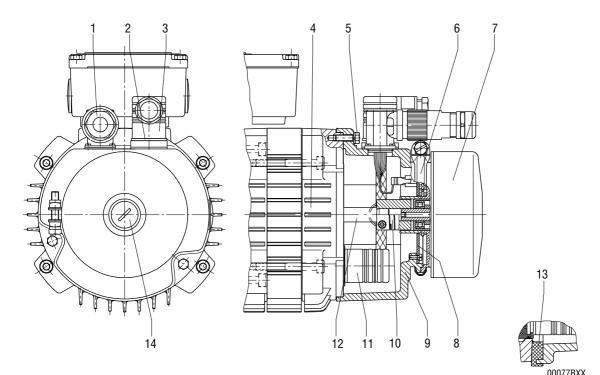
DFY 71 ... 112 .. B AGY brake motor
